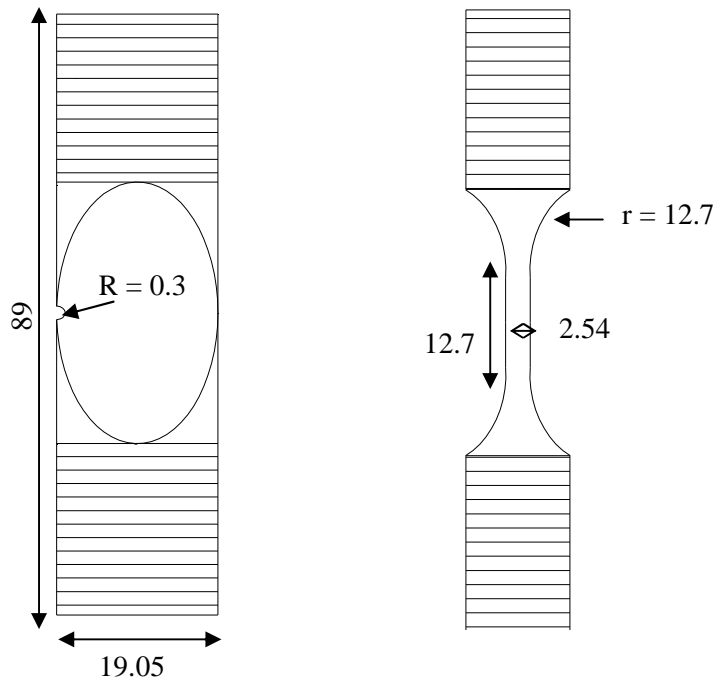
Threaded specimen geometry of SAE 1045 steel (all dimensions are in mm)
